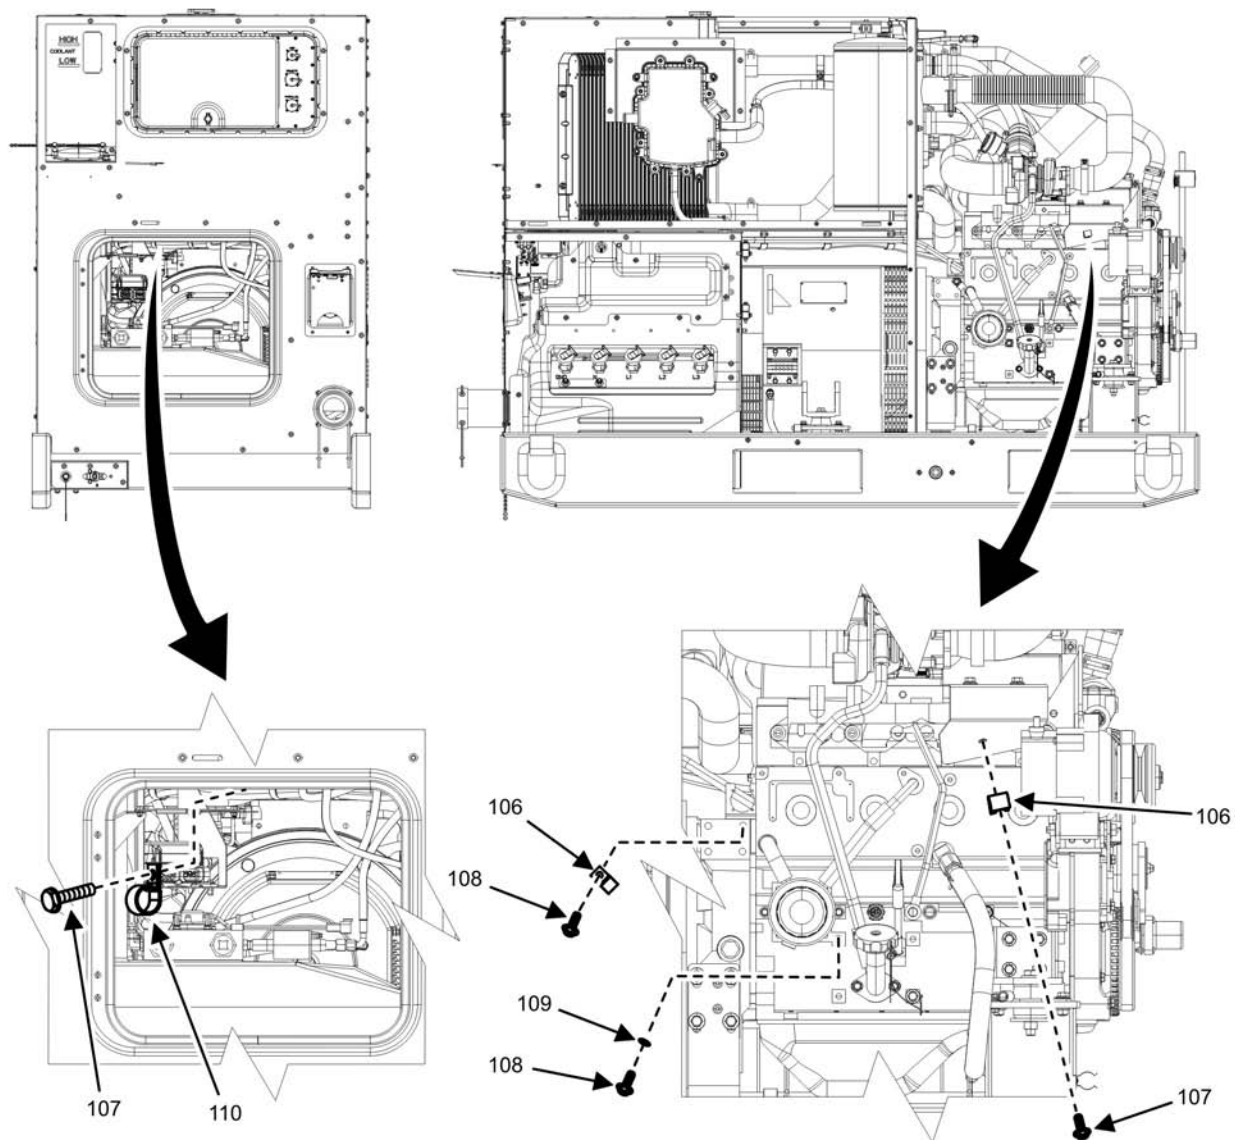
Engine Wiring Harness (Sheet 17 of 19).
